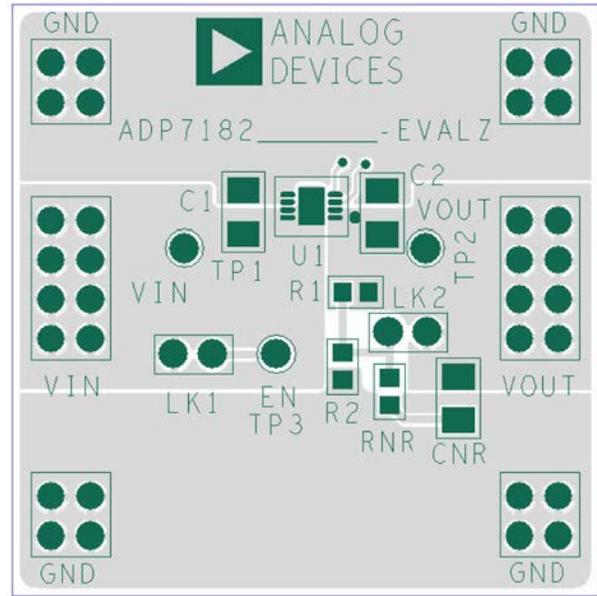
Example of the 8-Lead LFCSP PCB Layout
